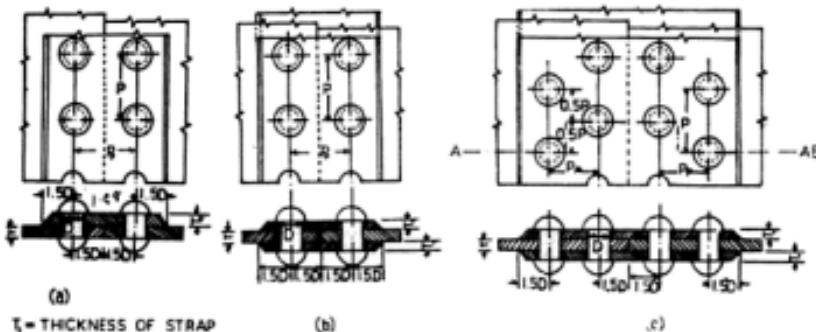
Different types of butt joints: (a) Single riveted, single strap, butt joint; (b) Single riveted, double strap butt joint; (c) Double riveted, double strap zig-zag butt
